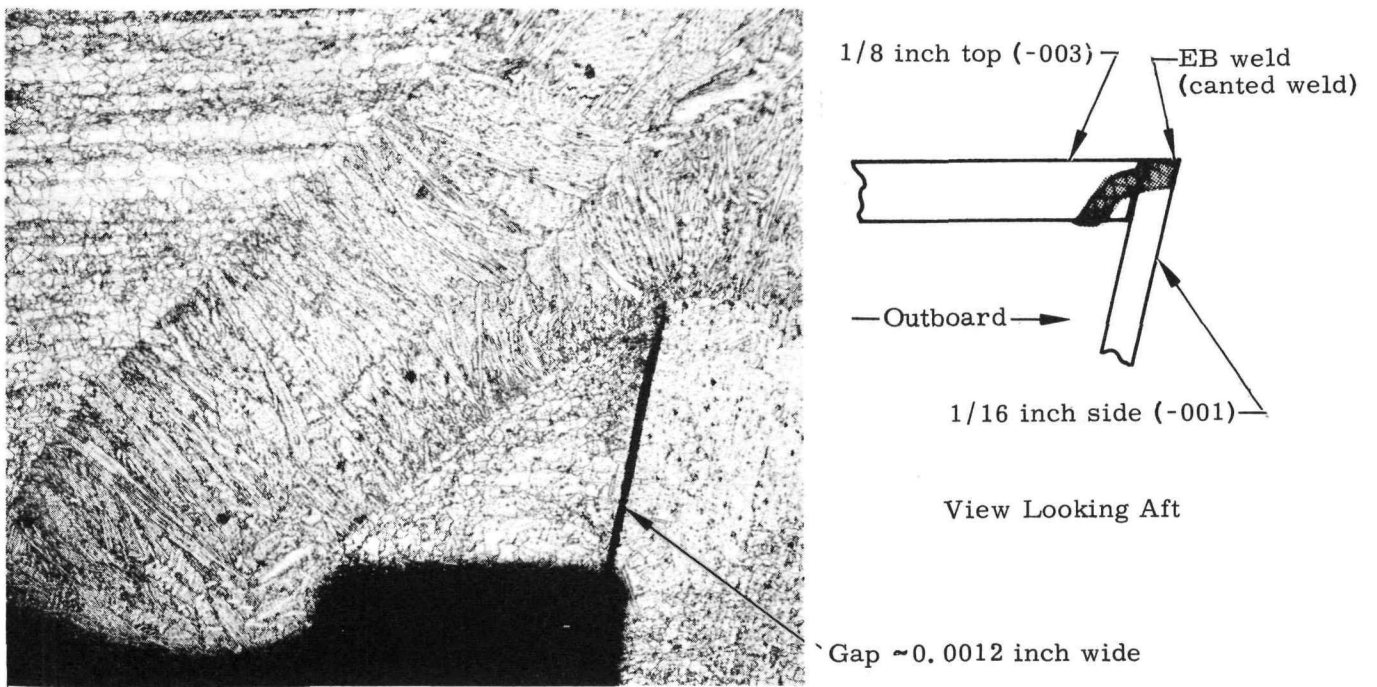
TYPICAL EB CANTED WELD ON SPECIMEN 2; MAGN 43X
